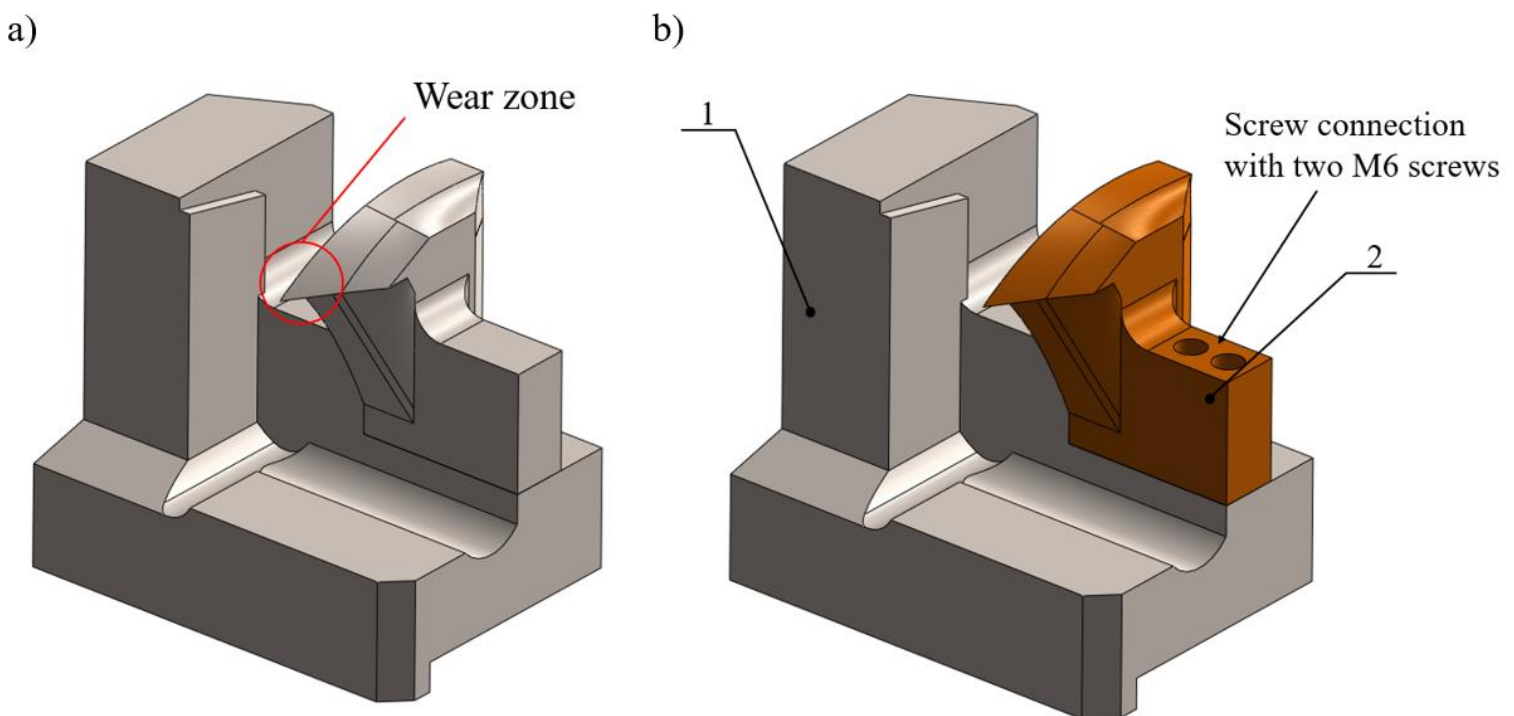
Part to be produced by DED-arc: a) Original part; b) Re-designed part: 1) Base part; 2) Interest part.
